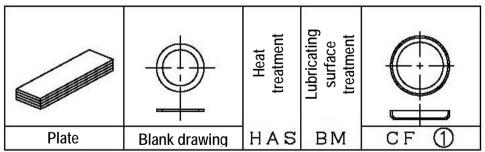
Manufacturing process table ② (CF + Cutting of end face only)
